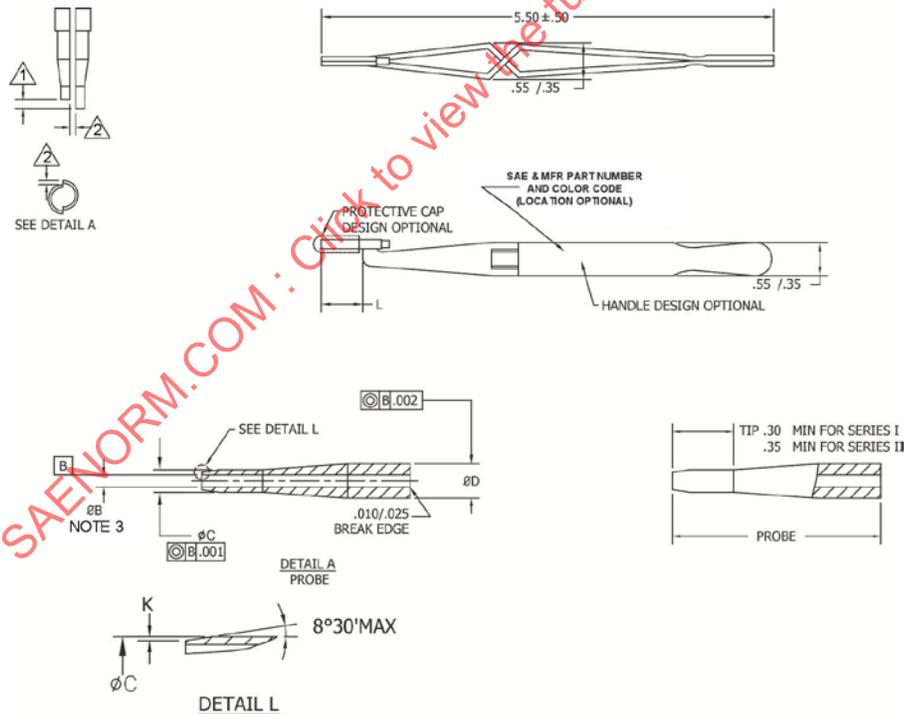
INLINE PROBE INSTALLING TOOL CONFIGURATION
